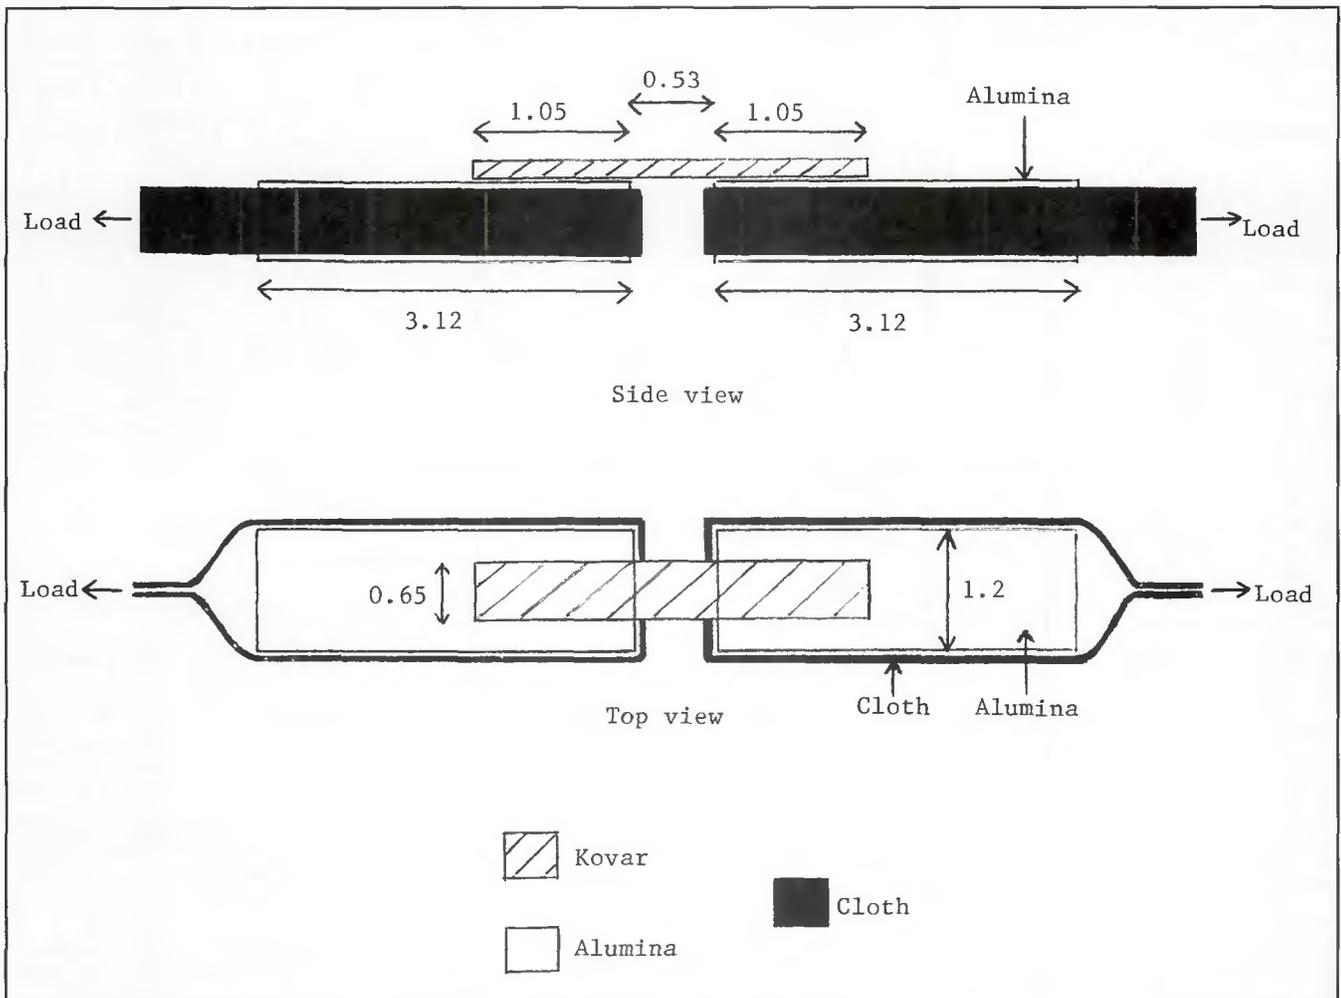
Sample configuration for joint strength measurement under shear load. Dimensions shown are in cm.
